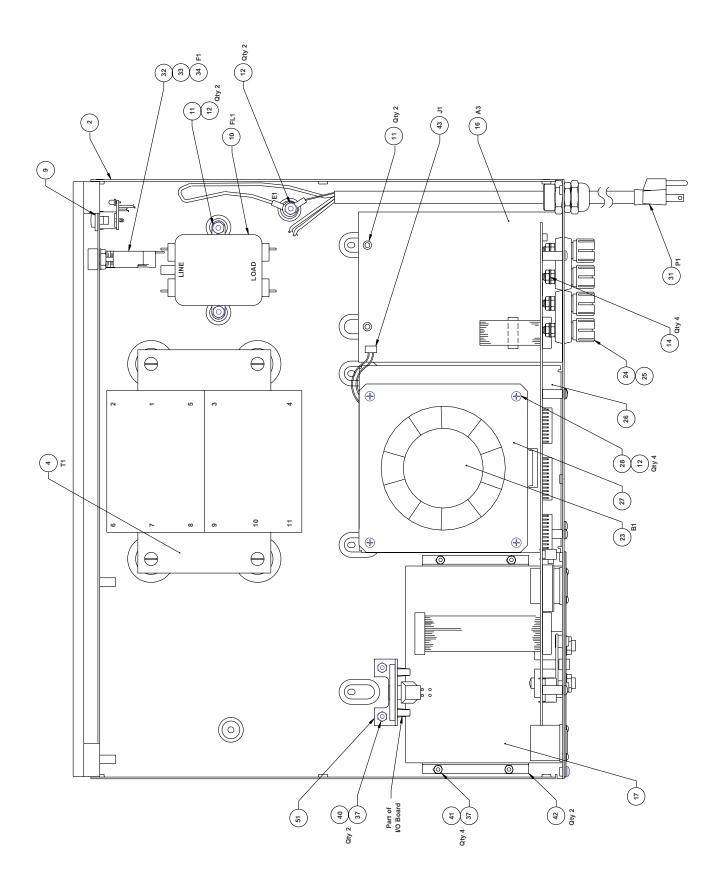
1600VI and 1800VI, Amplifier Assembly Removed View
